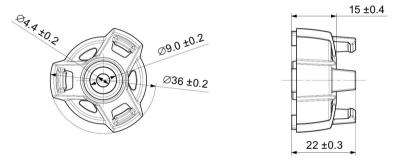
Dimension drawing of spacer 6GT2690-0AK00
